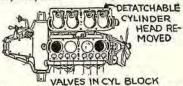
To grind valves on an engine with valves on the side and detachable cylinder head (Ford engine).
